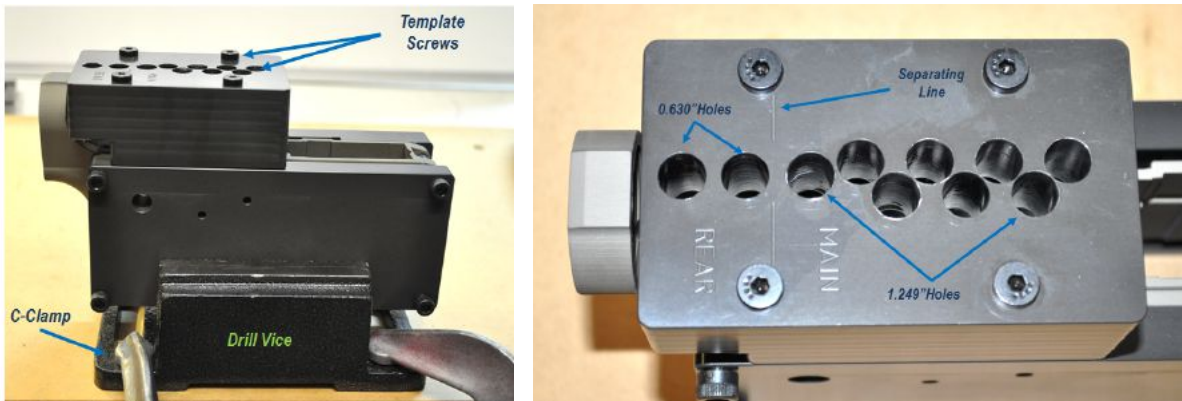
(left): fixture assembled with drill template and depth gauge
